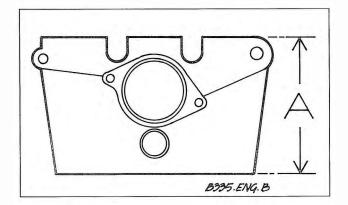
Front view of cylinder head showing minimum resurfacing dimension (A). 6-cylinder engine shown.
